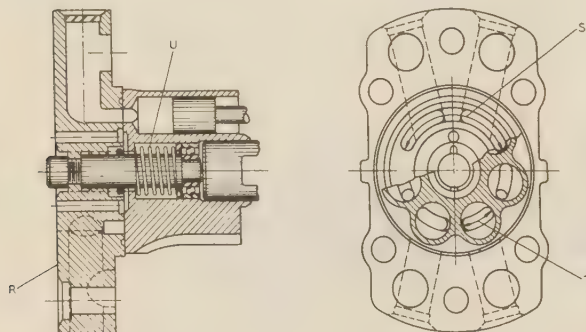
DETAILS OF PORTING IN CYLINDER BLOCK AND VALVE PLATES OF VARIABLE-DELIVERY AXIAL-PISTON PUMP
